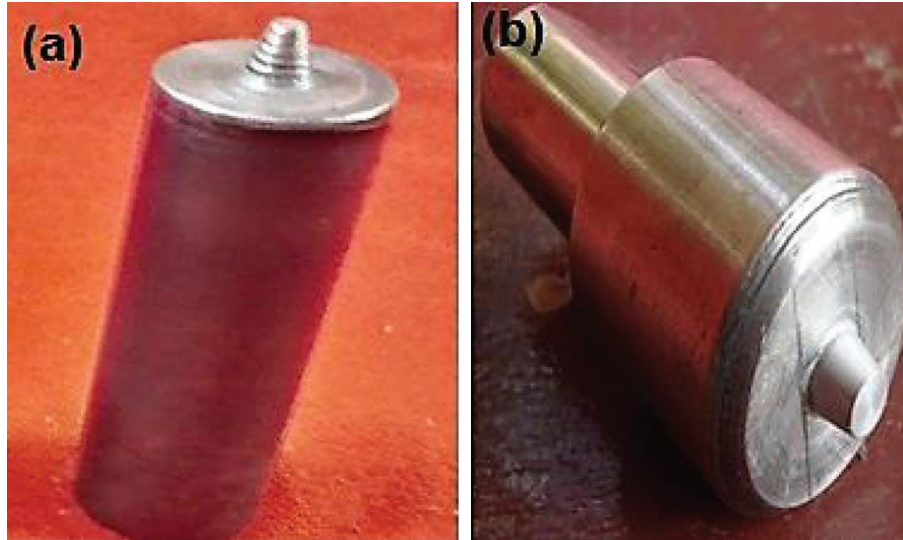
Picture of tool pins. (a) Tapered tool pin cylindrical shape with threads (TPT). (b) Tapered tool pin cylindrical shape without threads (TPNT).
